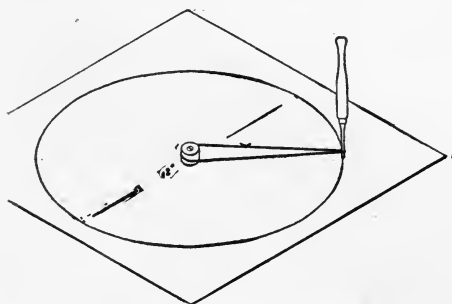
METHOD OF CUTTING GLASS DISCS.
